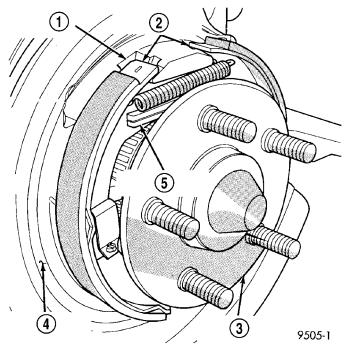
Parking Brake Assembly With Rear Disc Brakes
